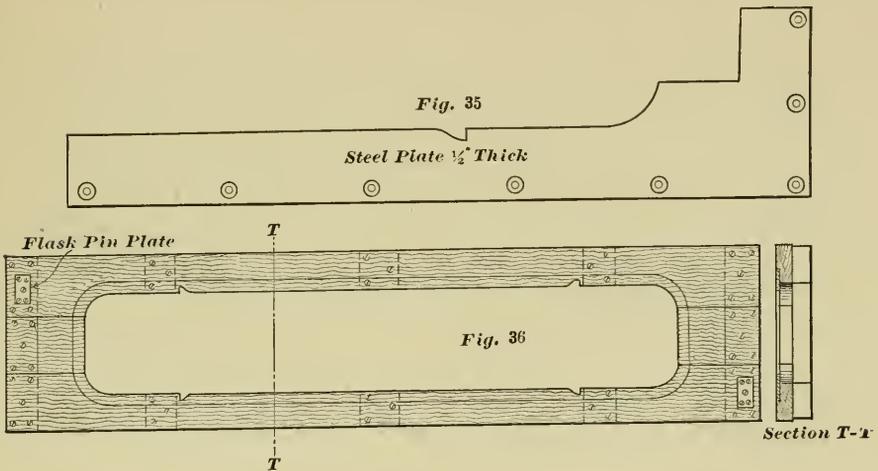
One Quarter of Steel Stripping Plate      Fig. 36. Plan of Wooden Stripping Plate
